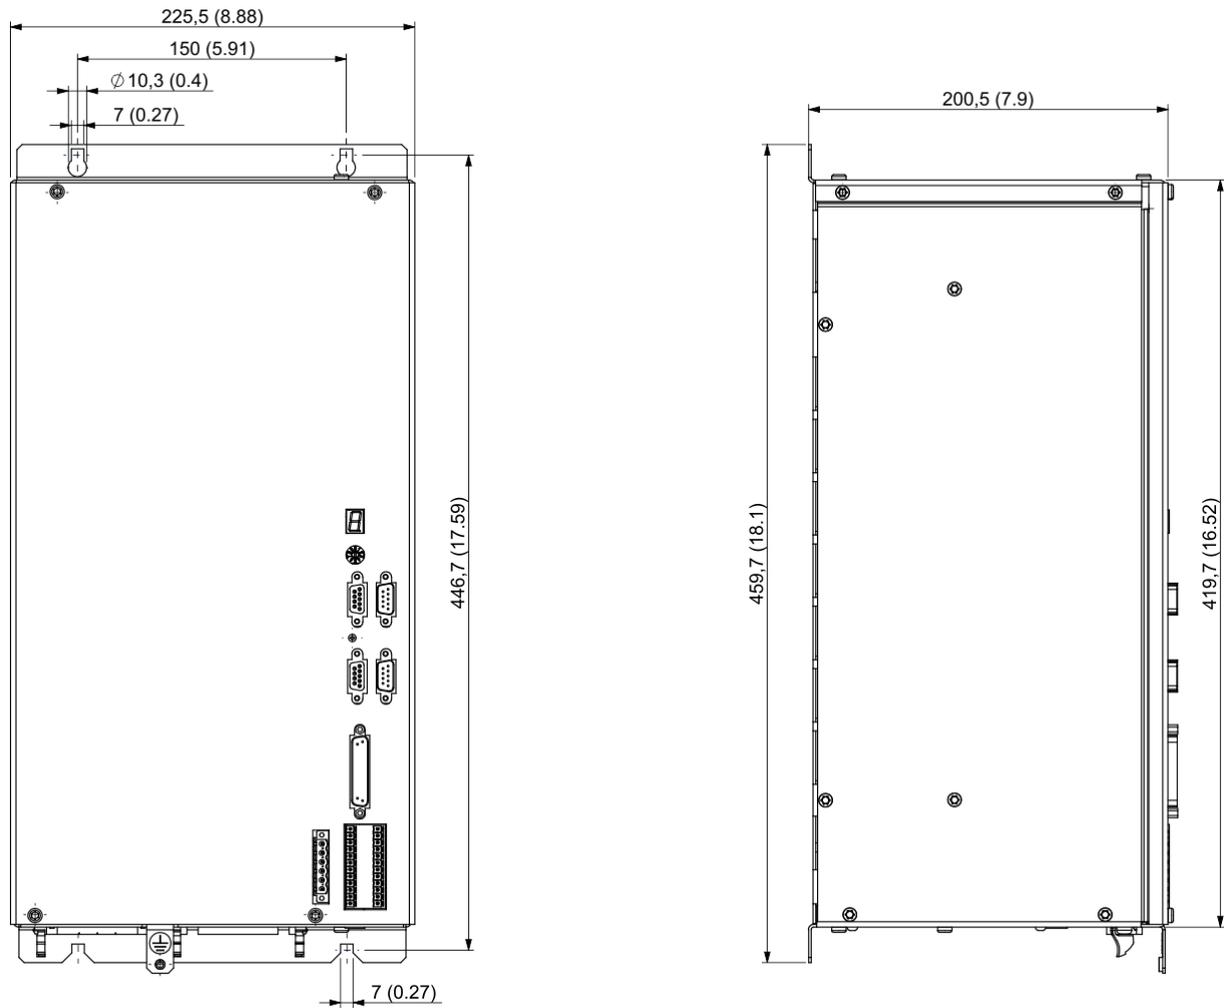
Dimensions of 0362146xx (device version < 4.200) in mm (inch)
